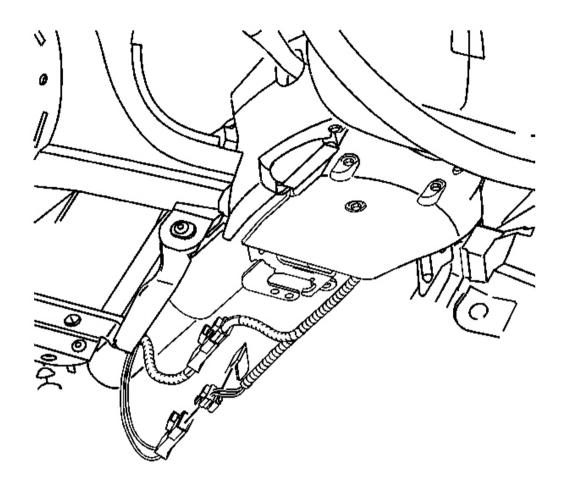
CPA & Steering Wheel Module Coil Connector Courtesy of GENERAL MOTORS CORP.
